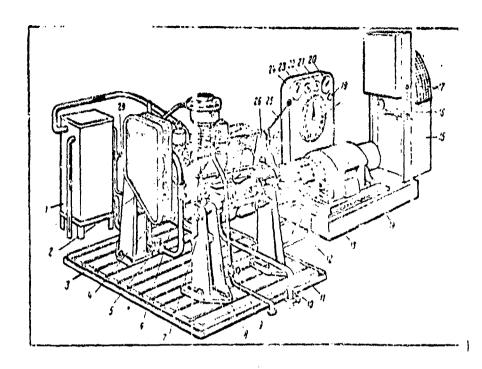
Stand for rolling and testing engines (ZIL-130 and ZIL-131):
